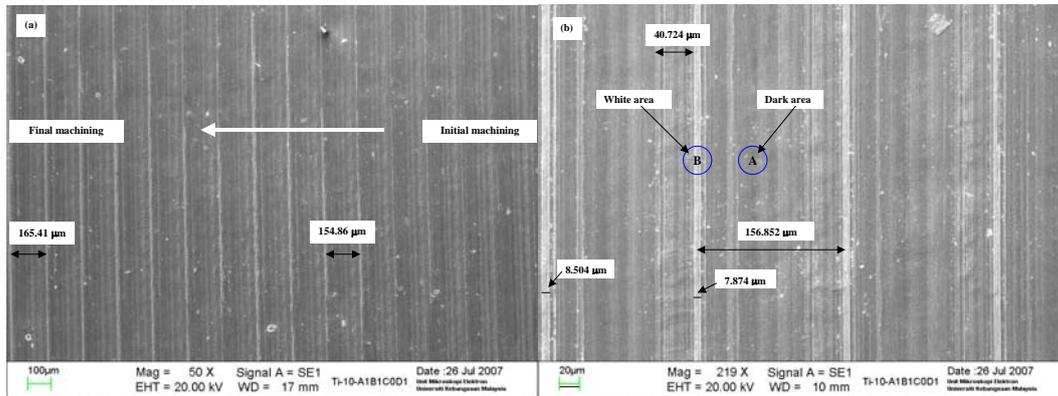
Surface Generated when Machining with Coated Cemented Carbide Insert Under Dry Machining (a) 50x Magnification and (b) 219x Magnification.
